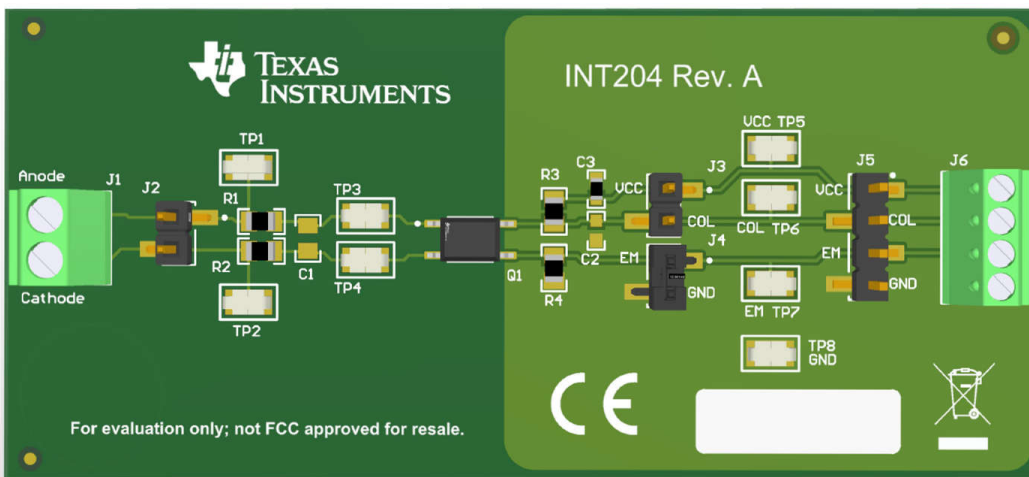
ISOM8110DFGEVM PCB 3D Diagram
